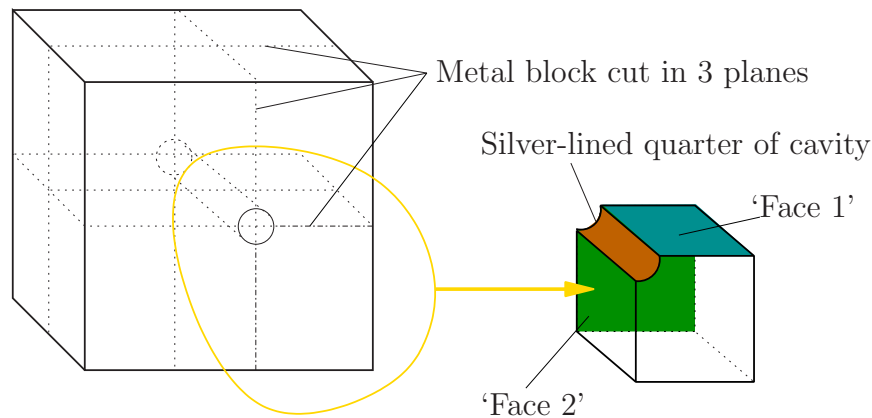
The large block is cut into a smaller, more manageable piece. The two marked faces will be polished.
